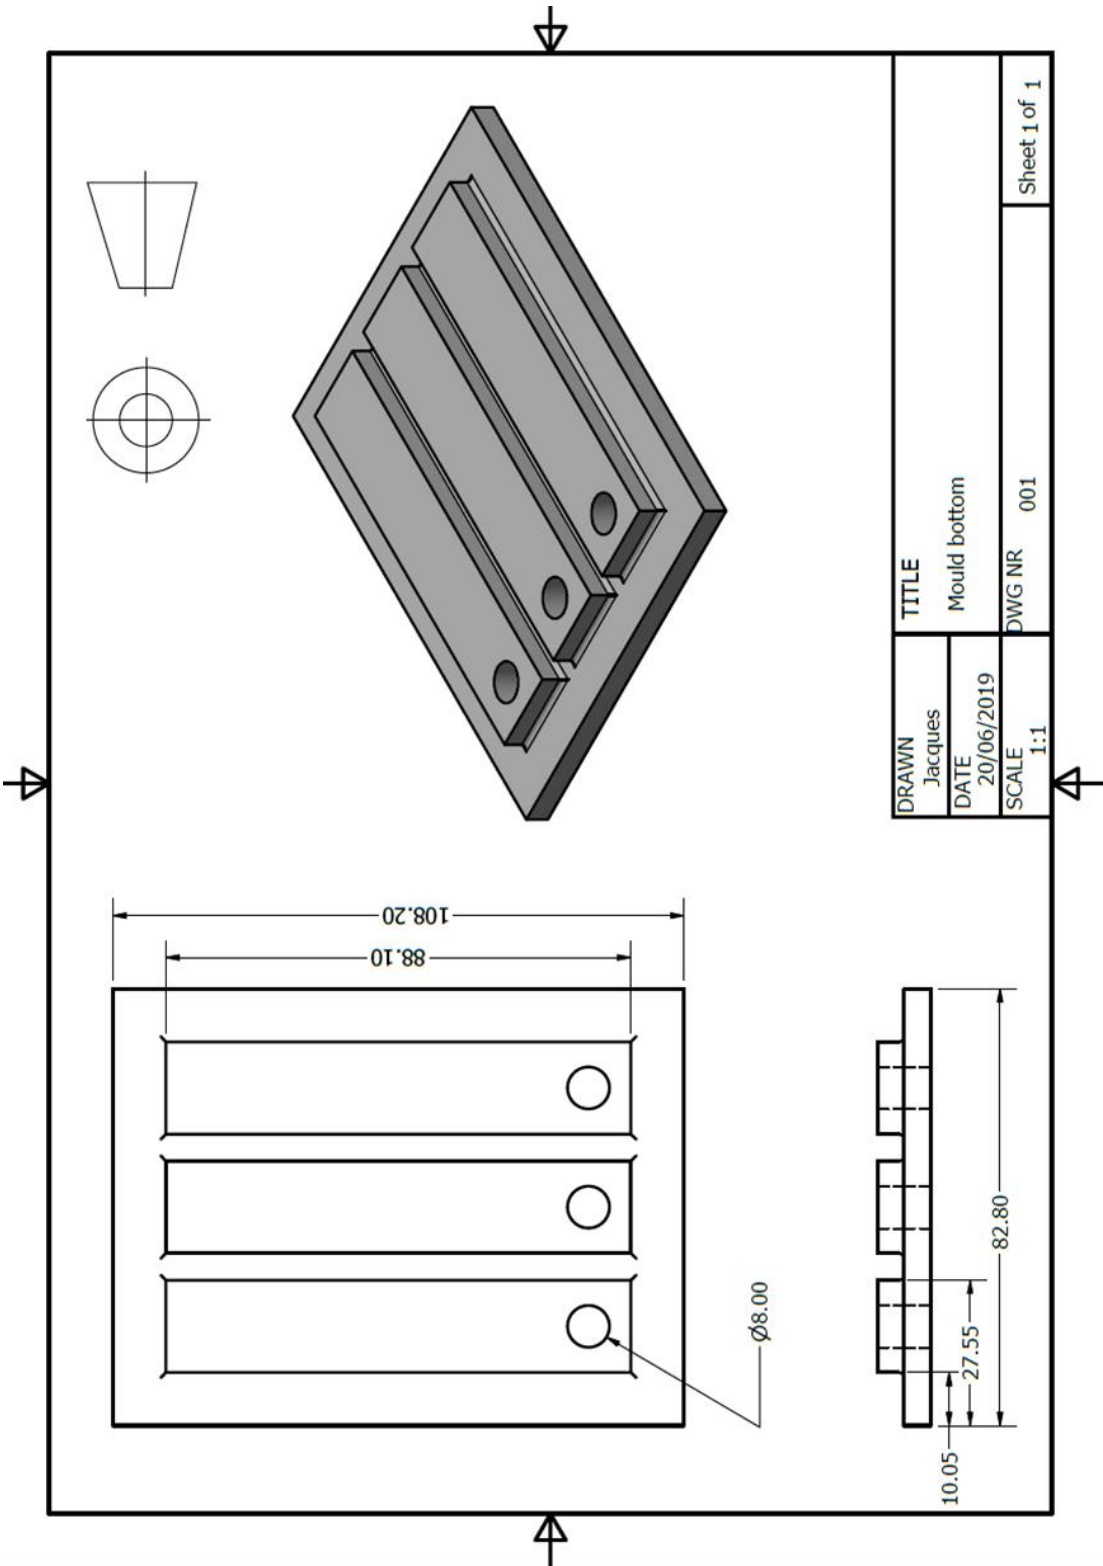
CAD drawing of the bottom part of the resin mould for 3D printing
